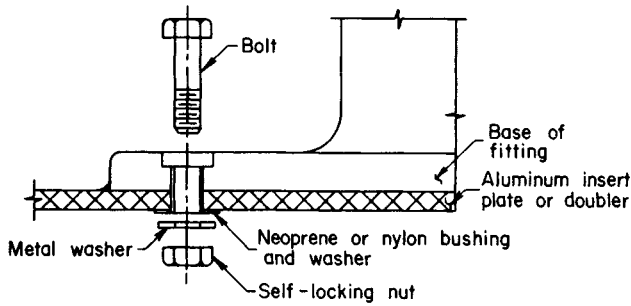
TYPICAL INSTALLATION DETAIL OF DISSIMILAR-METAL FITTINGS(103)
